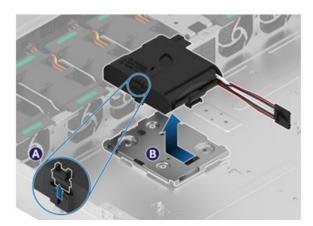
Intel® RMFBU Mounting Bracket Removal - Chassis
